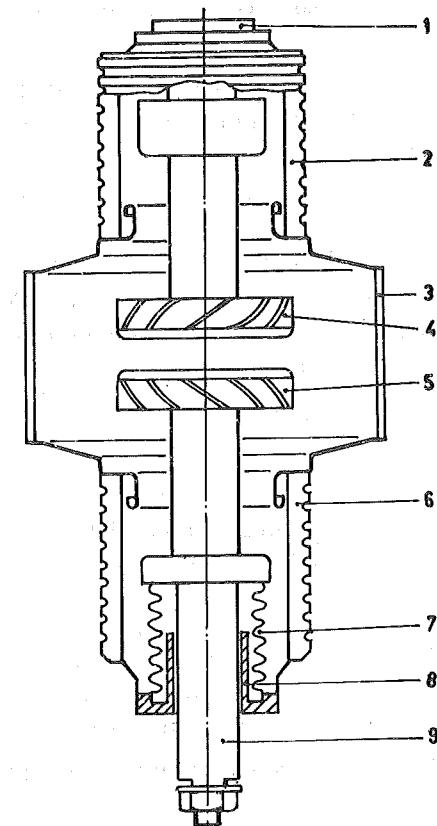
Cross-Sectional View of Vacuum Interrupter
